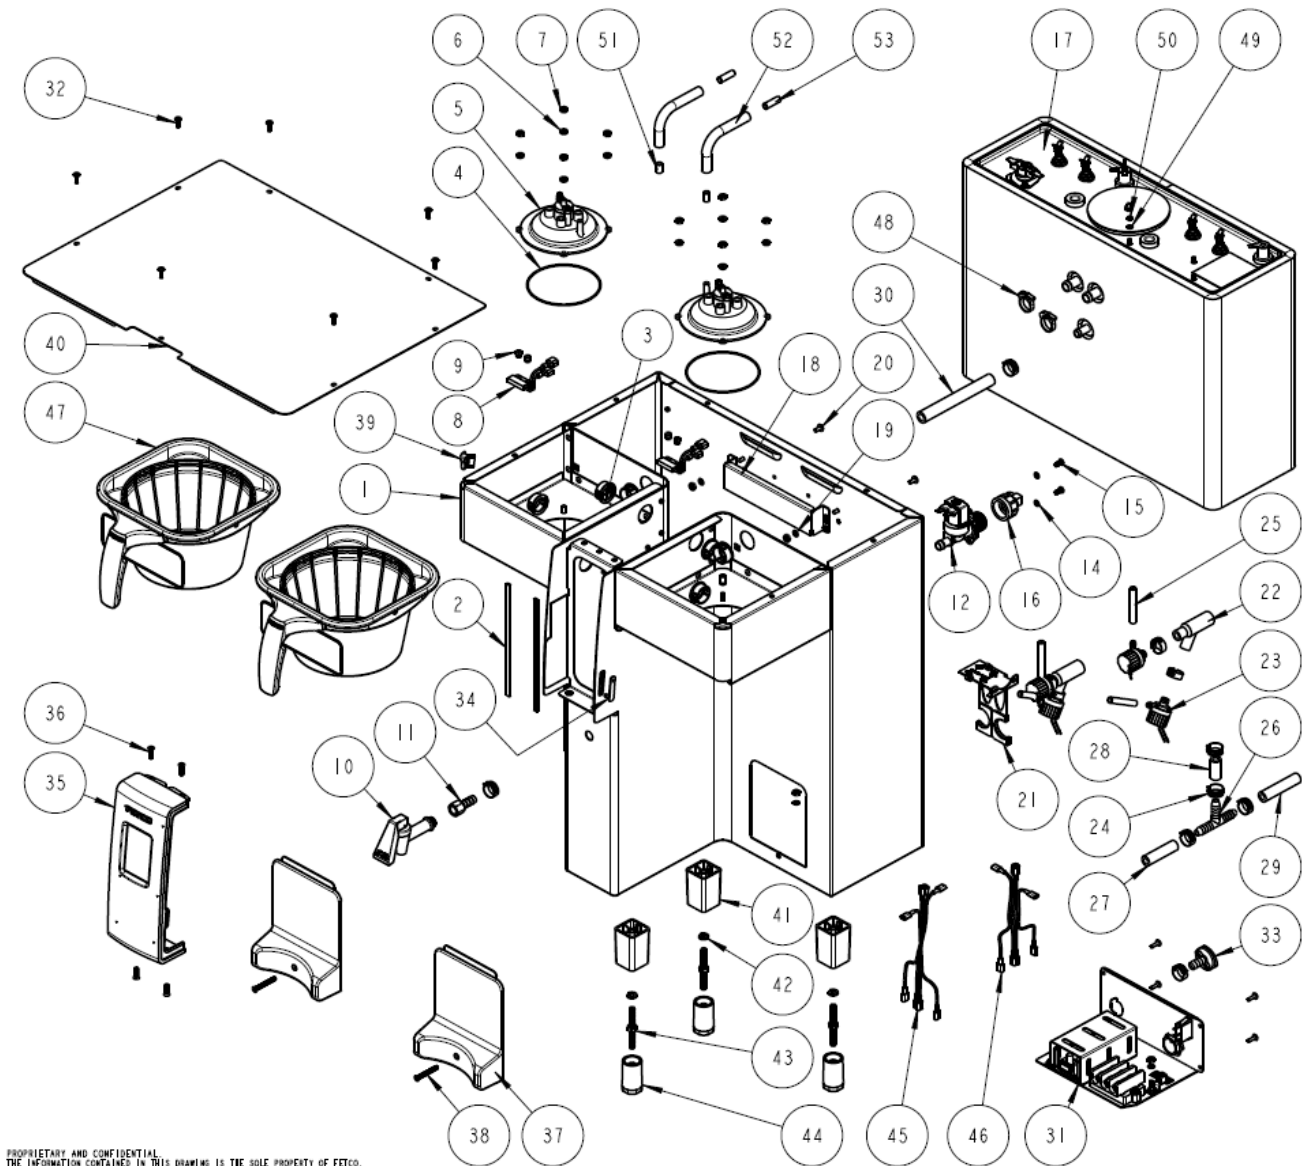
TANK ASSY, 2300W/120VAC, CBS-2131, GROMMETS
